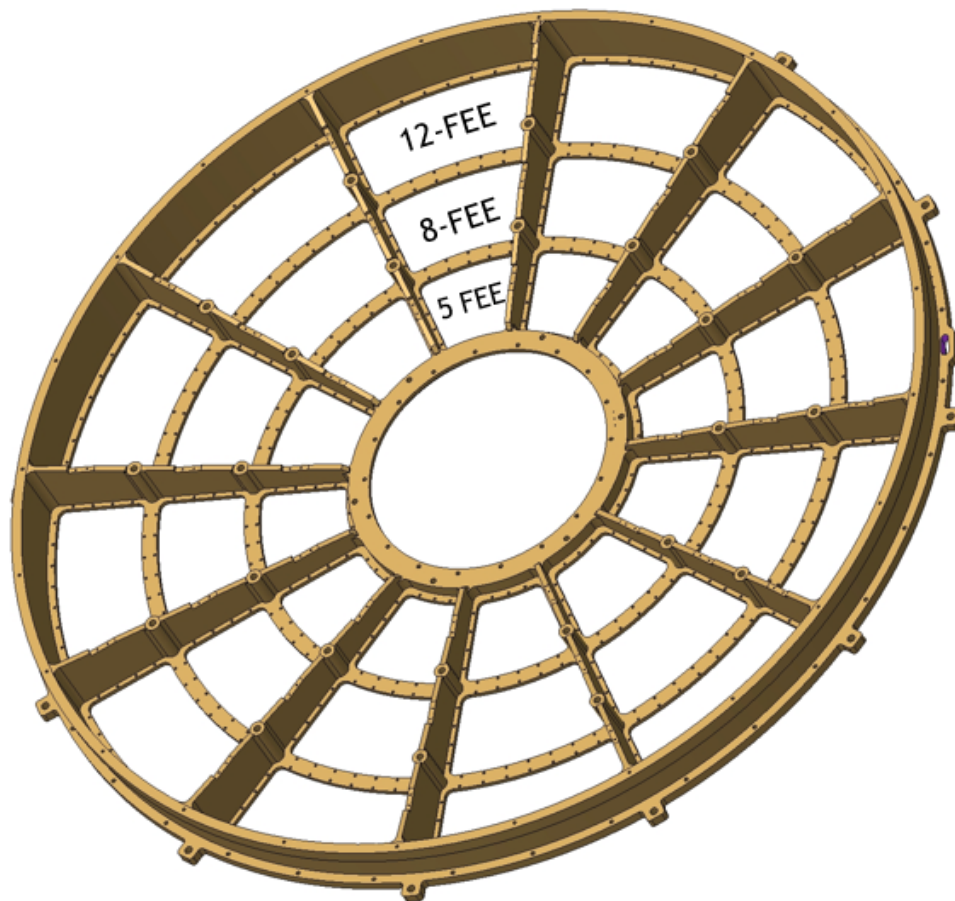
The TPC "wagon wheel" shall be machined from single piece Al to eliminate cracks and minimize leaks.
